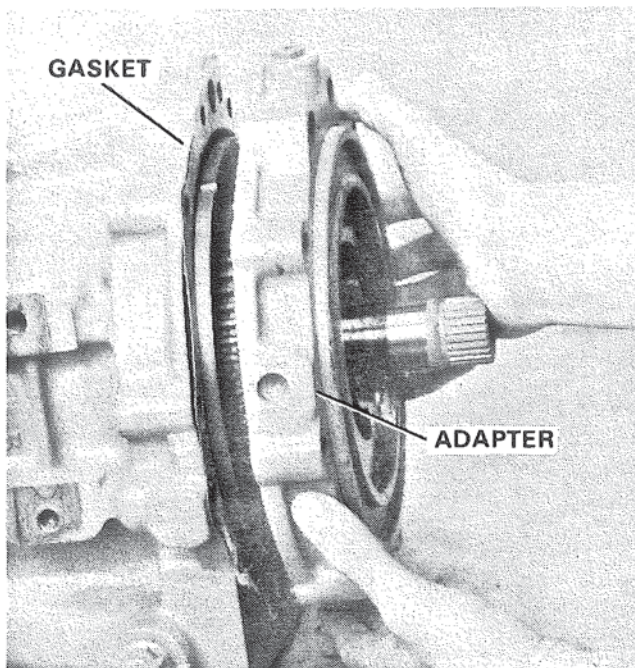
Removing Adapter and Reverse Clutch Assembly from Case.
